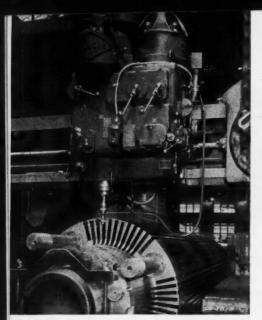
Milling the Wedge Slots in the Assembled Rotor
